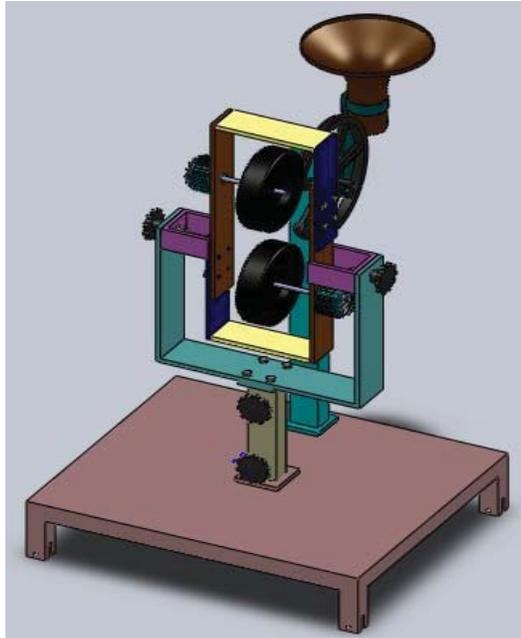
Computer model of volleyball throwing machine prototype showing ball shooter and ball feeder
